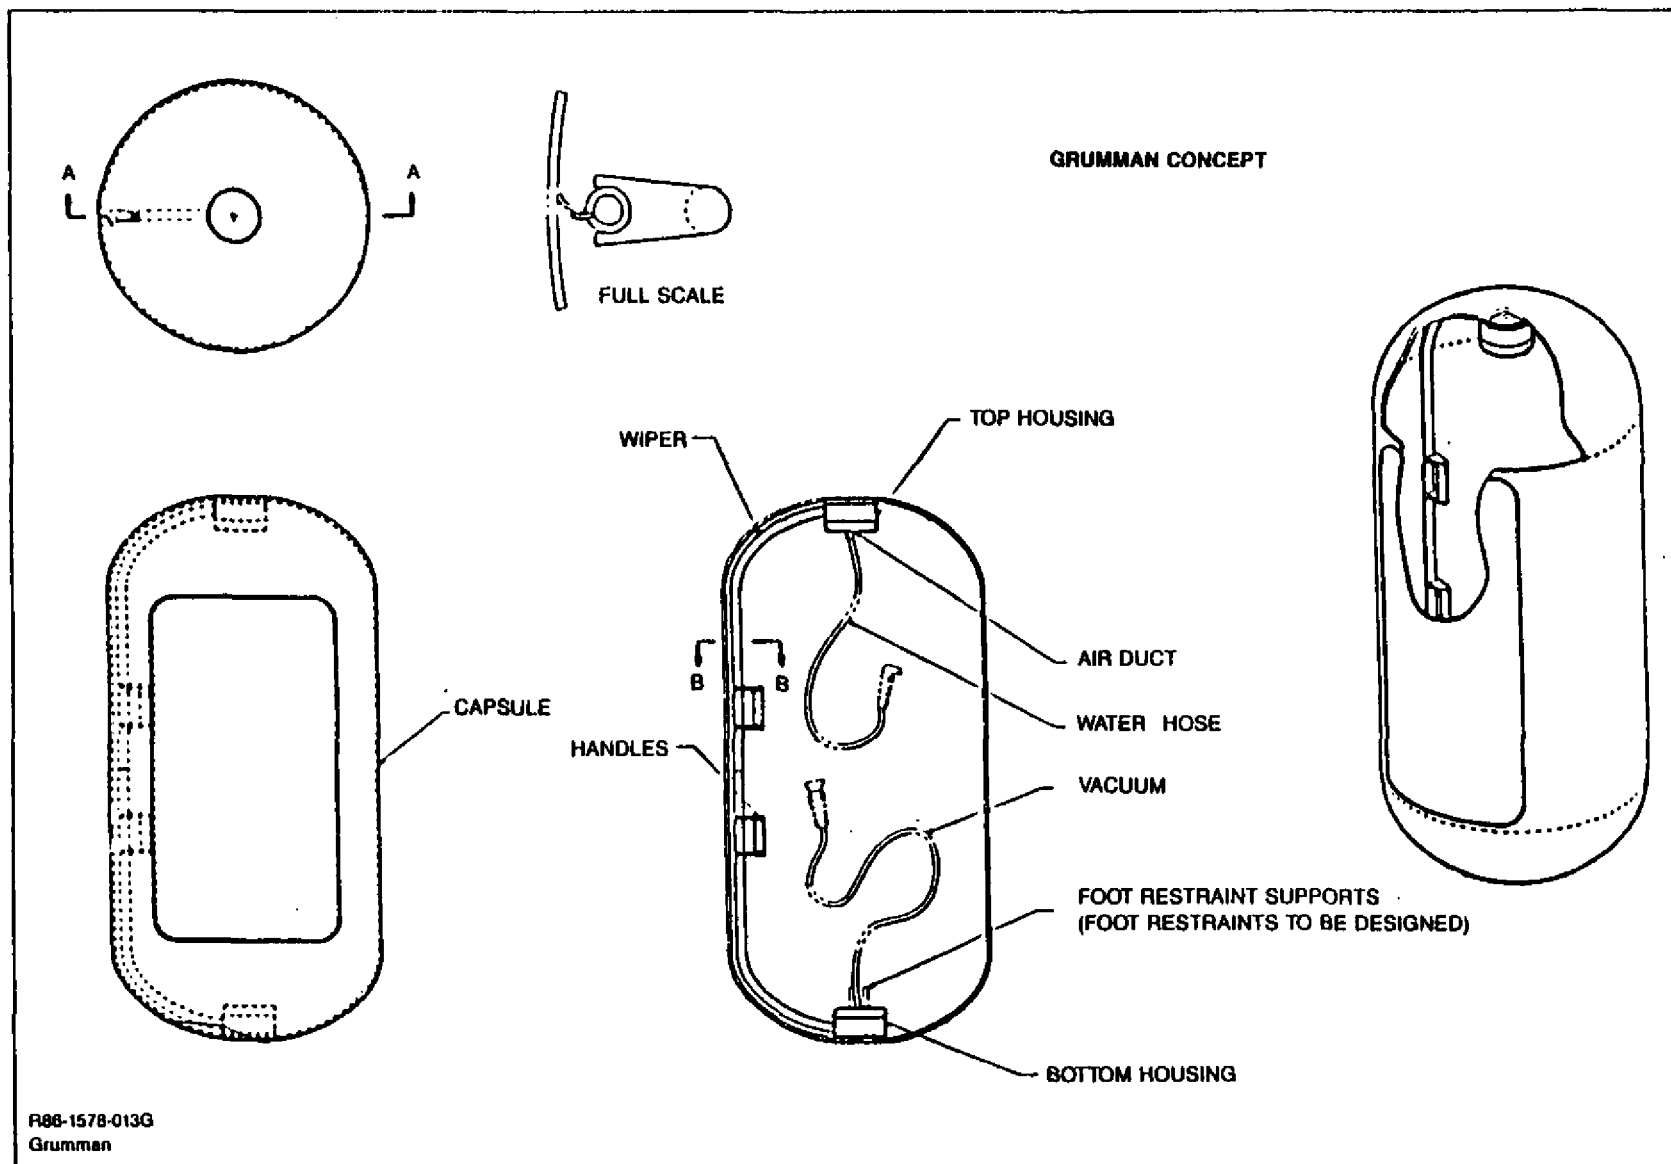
B Rotating Vacuum Squeegee Clean-up Shower
